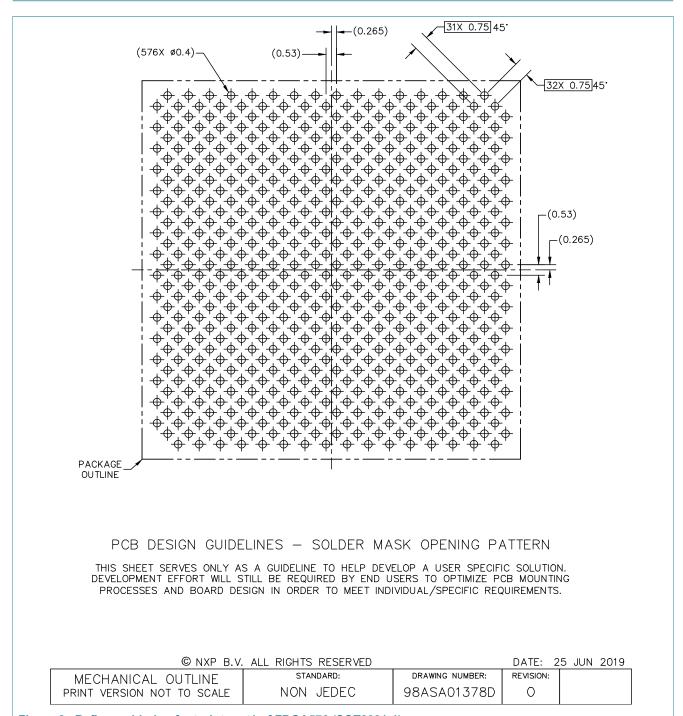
Reflow soldering footprint part1 of FBGA576 (SOT2031-1)
